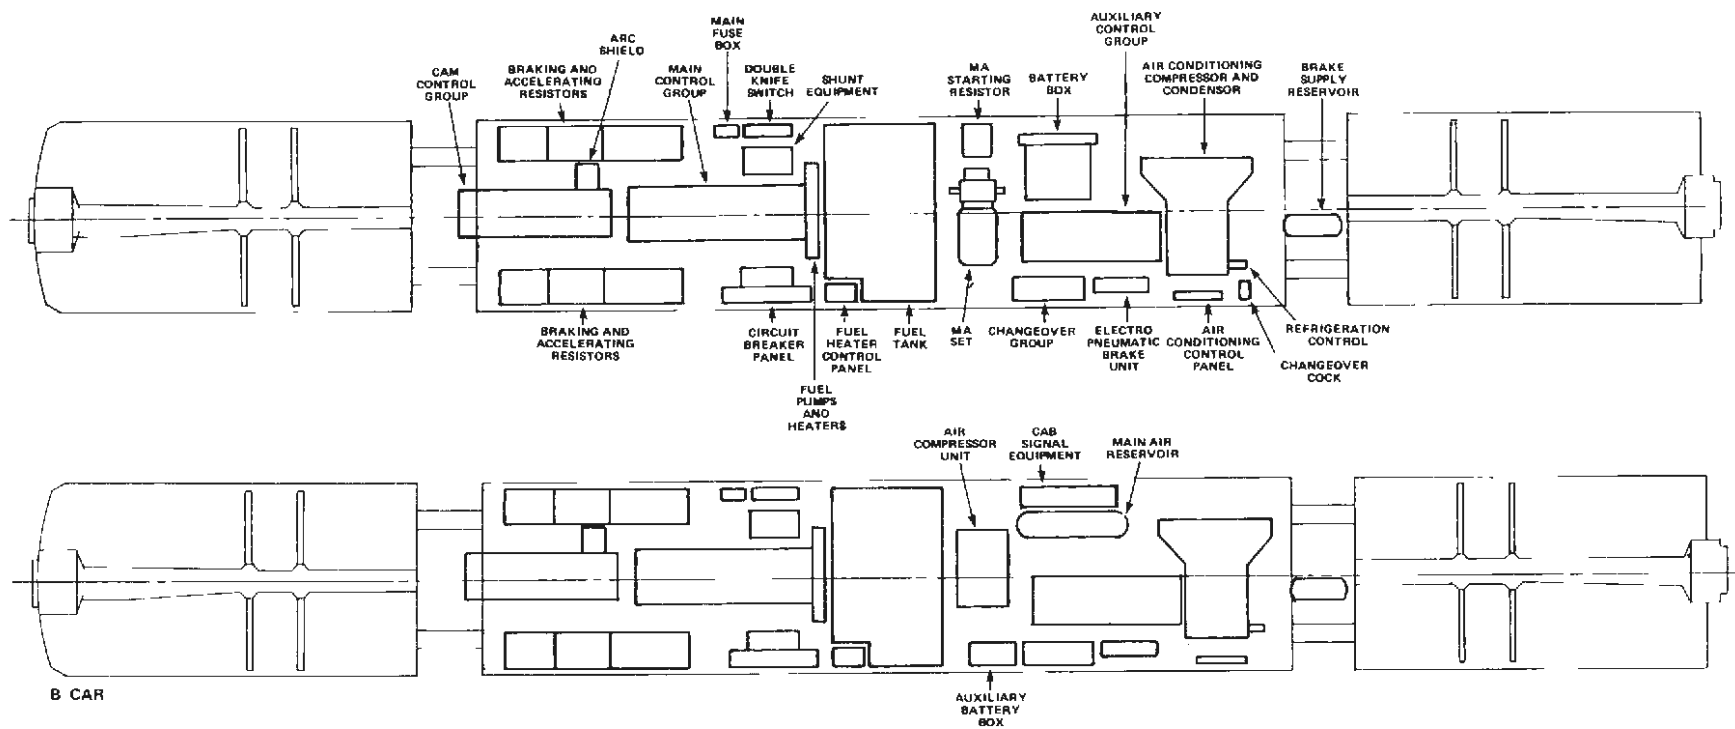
General Electric GT/E Underfloor Equipment Arrangement
